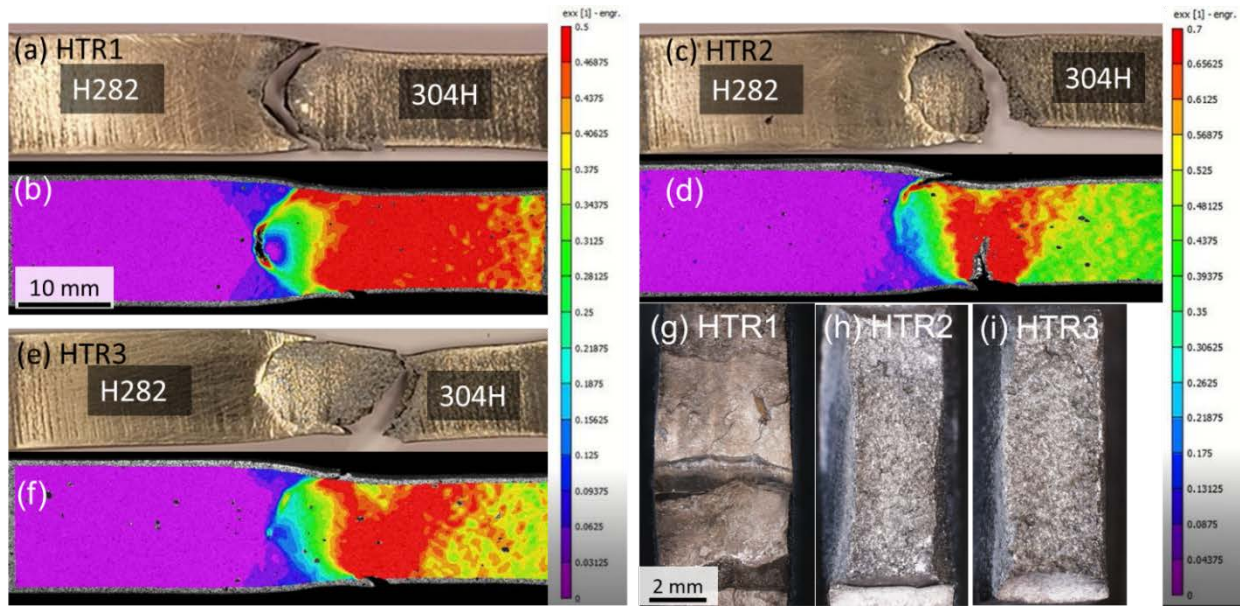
(a–b) HTR1 fracture location DIC engineering strain map, (c–d) HTR2 fracture location DIC engineering strain map, (e–f) HTR3 fracture location DIC engineering strain map, (g) HTR1 fracture surface, (h) HTR2 fracture surface, and (i) HTR3 fracture surface
